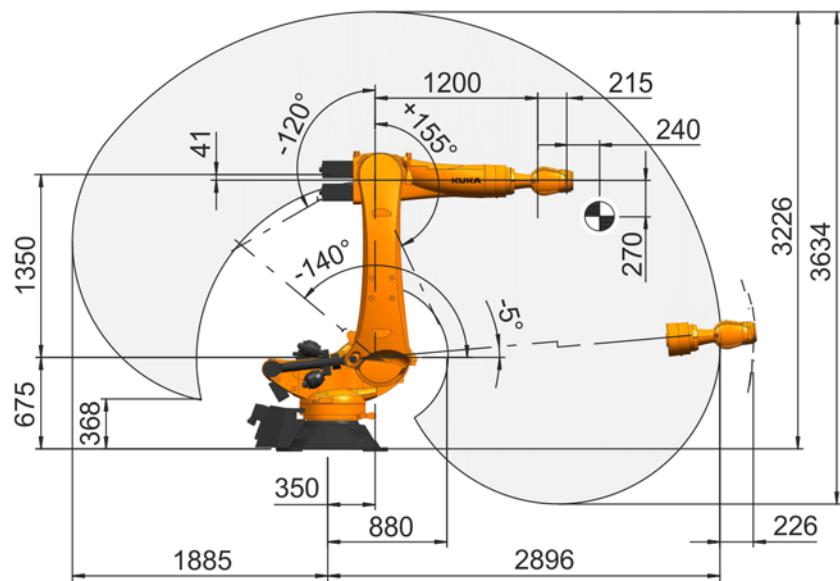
KR 180 R2900 prime, working envelope, side view
